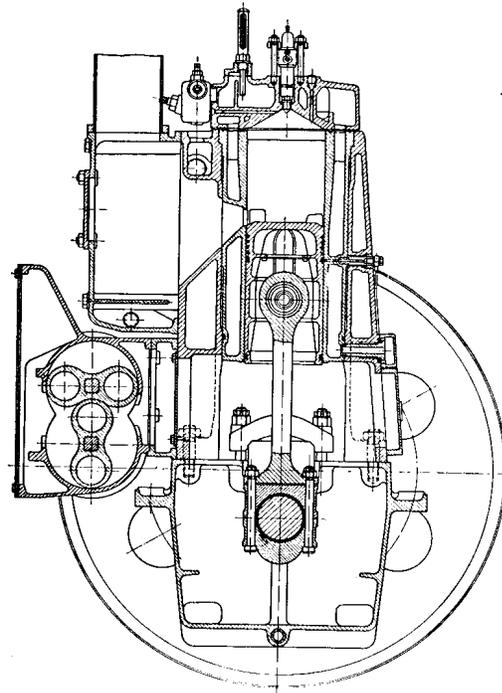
Buckan 6.9 in. \times 8.6 in., 600 Rpm Engine with Large Expansion Chamber.
